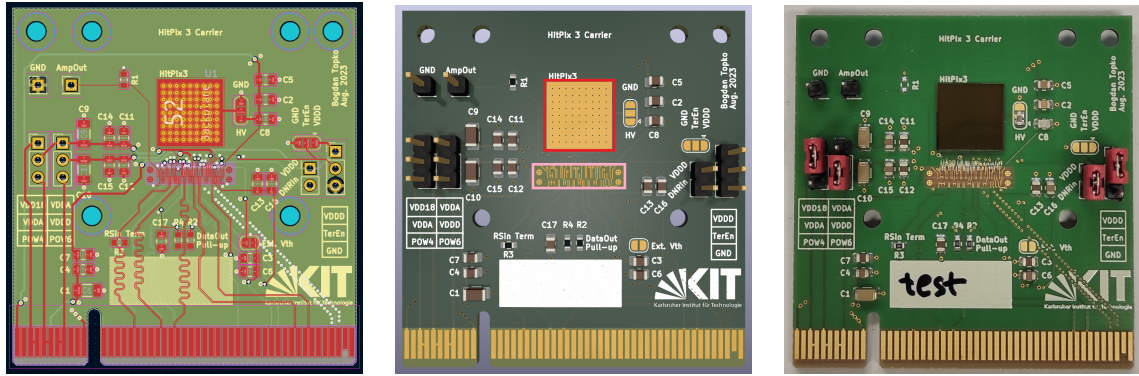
Single sensor carrier layout (left), 3D render (center), and photograph after an assembly (right). The red and pink boxes in the 3D render outline the sensor mounting pad and wire-bonding pads, respectively. The photograph is taken from [ZTP26].
